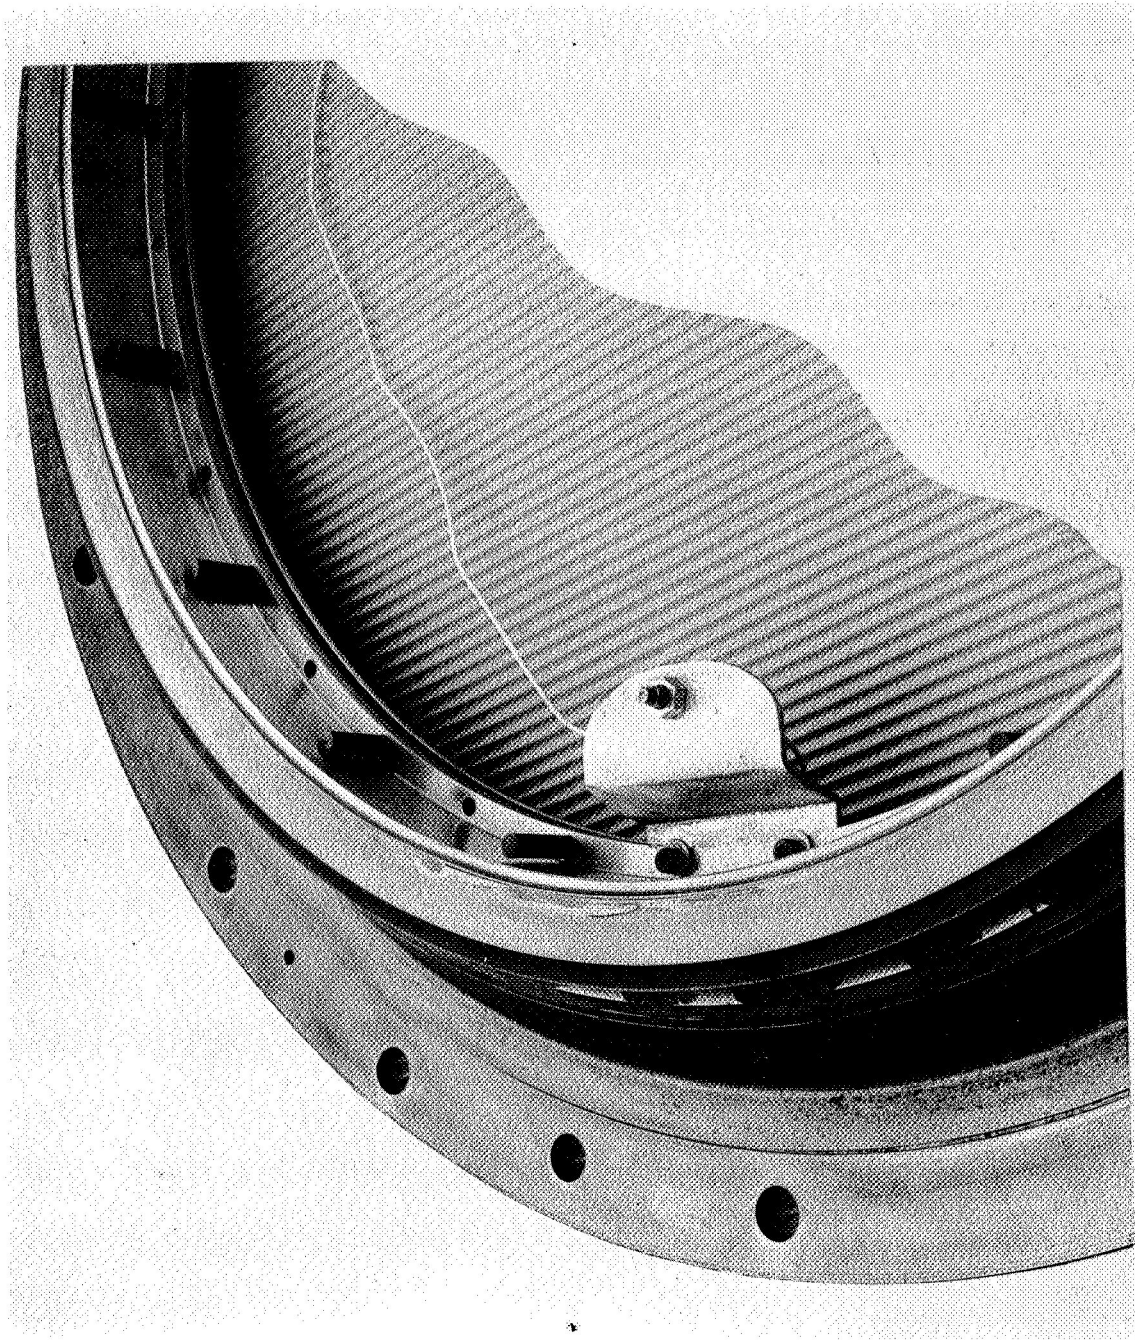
131 Seal Face Plating Damage After Dynamic Test (C 680313110)
